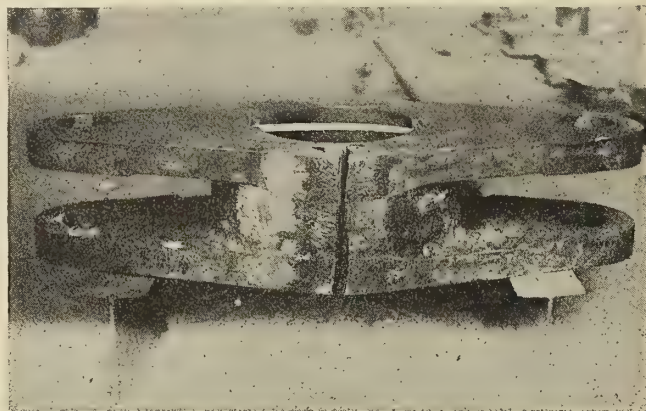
One Side of Rudderhead Partly Cut Out by Oxy-Acetylene Torch
